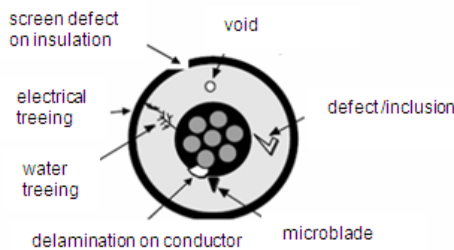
Typical defects in extruded cables leading to partial discharges [2]
